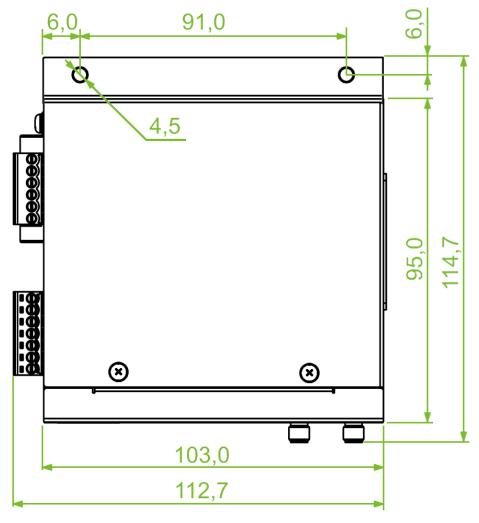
Router Dimensions (with wall mounting clip) - Top View
